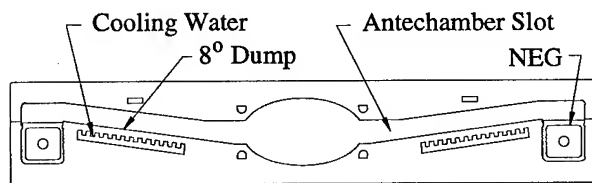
Wiggler Vacuum Chamber Cross-Section
